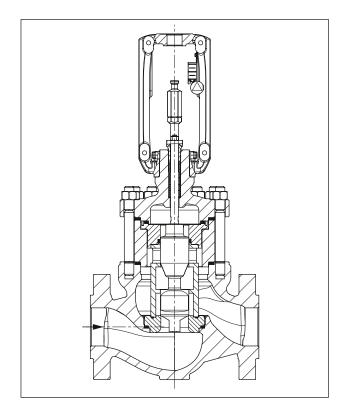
Type 261GR Globe Valve with 3-stage CDST plug
